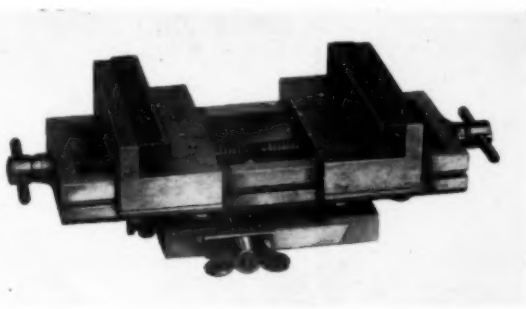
Elektron clamp for special type of machine shown above. Castings by Birmingham Aluminium Castings (1903) Co., Ltd.
